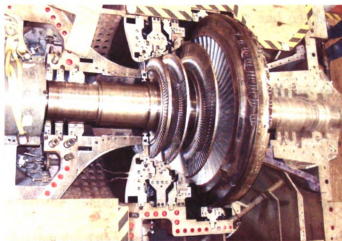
Assembled rotor in the lower half of steam turbine casing.
